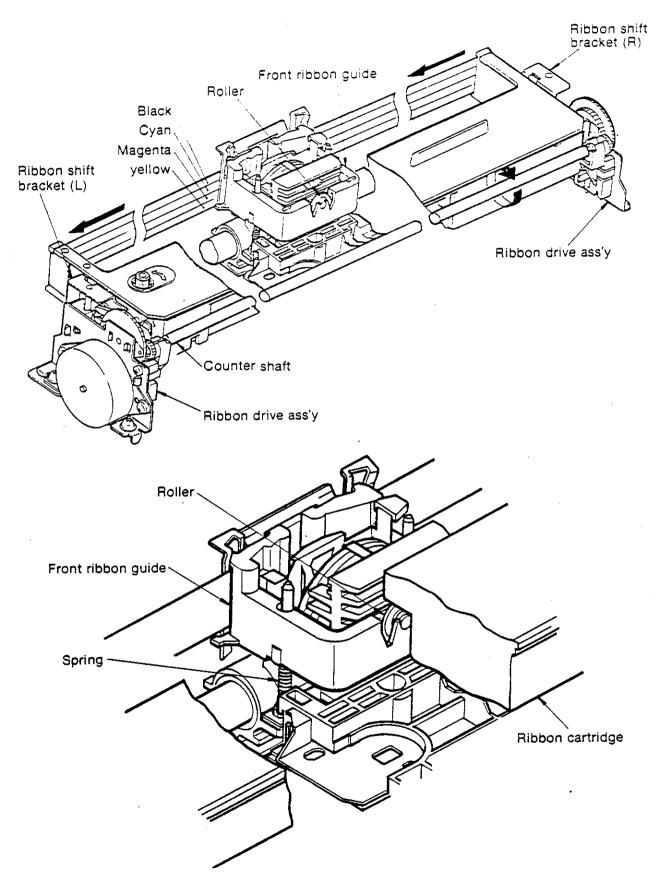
Ribbon drive assembly and peripheral mechanisms
